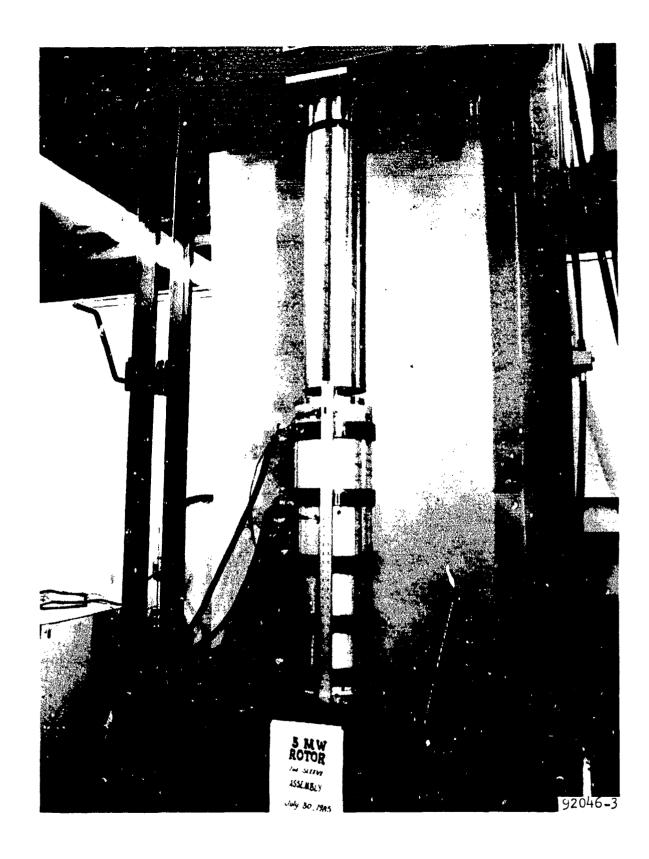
Rotor and Heat Sink Prior to Installing Insulation
